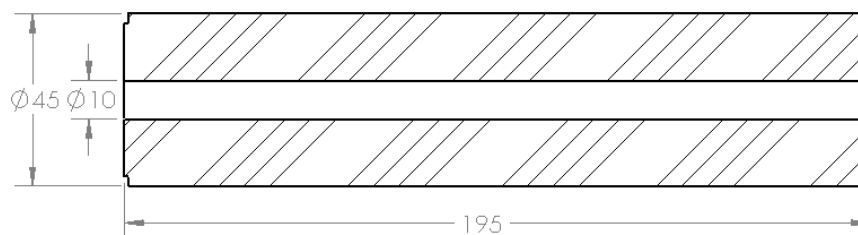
Geometry and dimensions in millimeters of the tested fuel grain.
